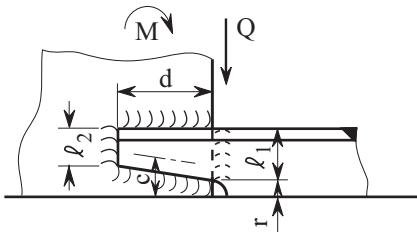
Profile joined by means of two flank and two frontal fillet welds (all round welding)
